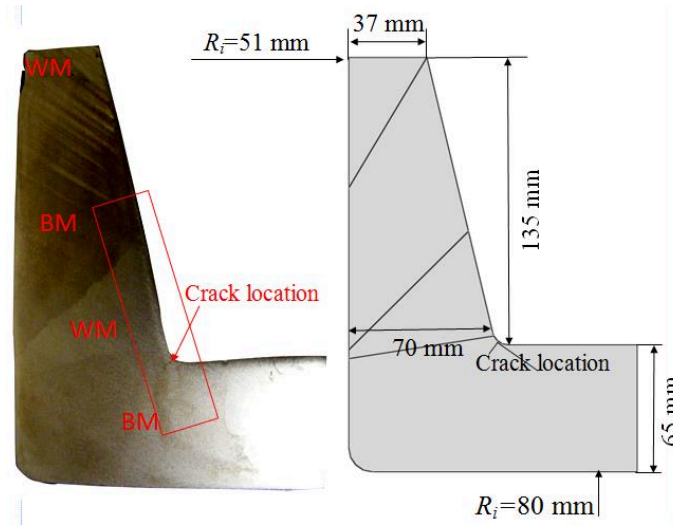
A cross section of the nozzle/header joint, showing the main dimensions used in the FE model and the positions of the crack, base and weld metal
